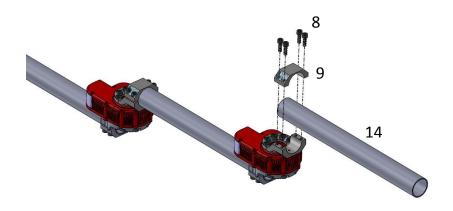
Attaching the Last Link to the Assembly shown in Figure 9 $\,$
